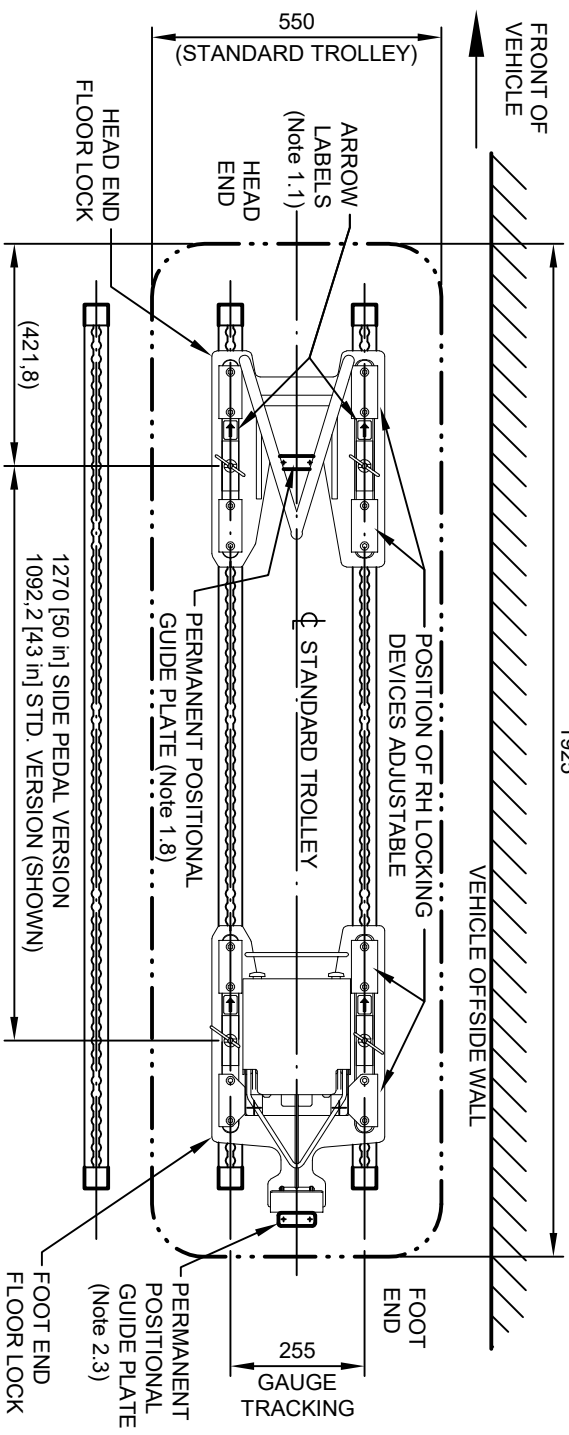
Two-part floor lock installed in standard position securing standard trolley
